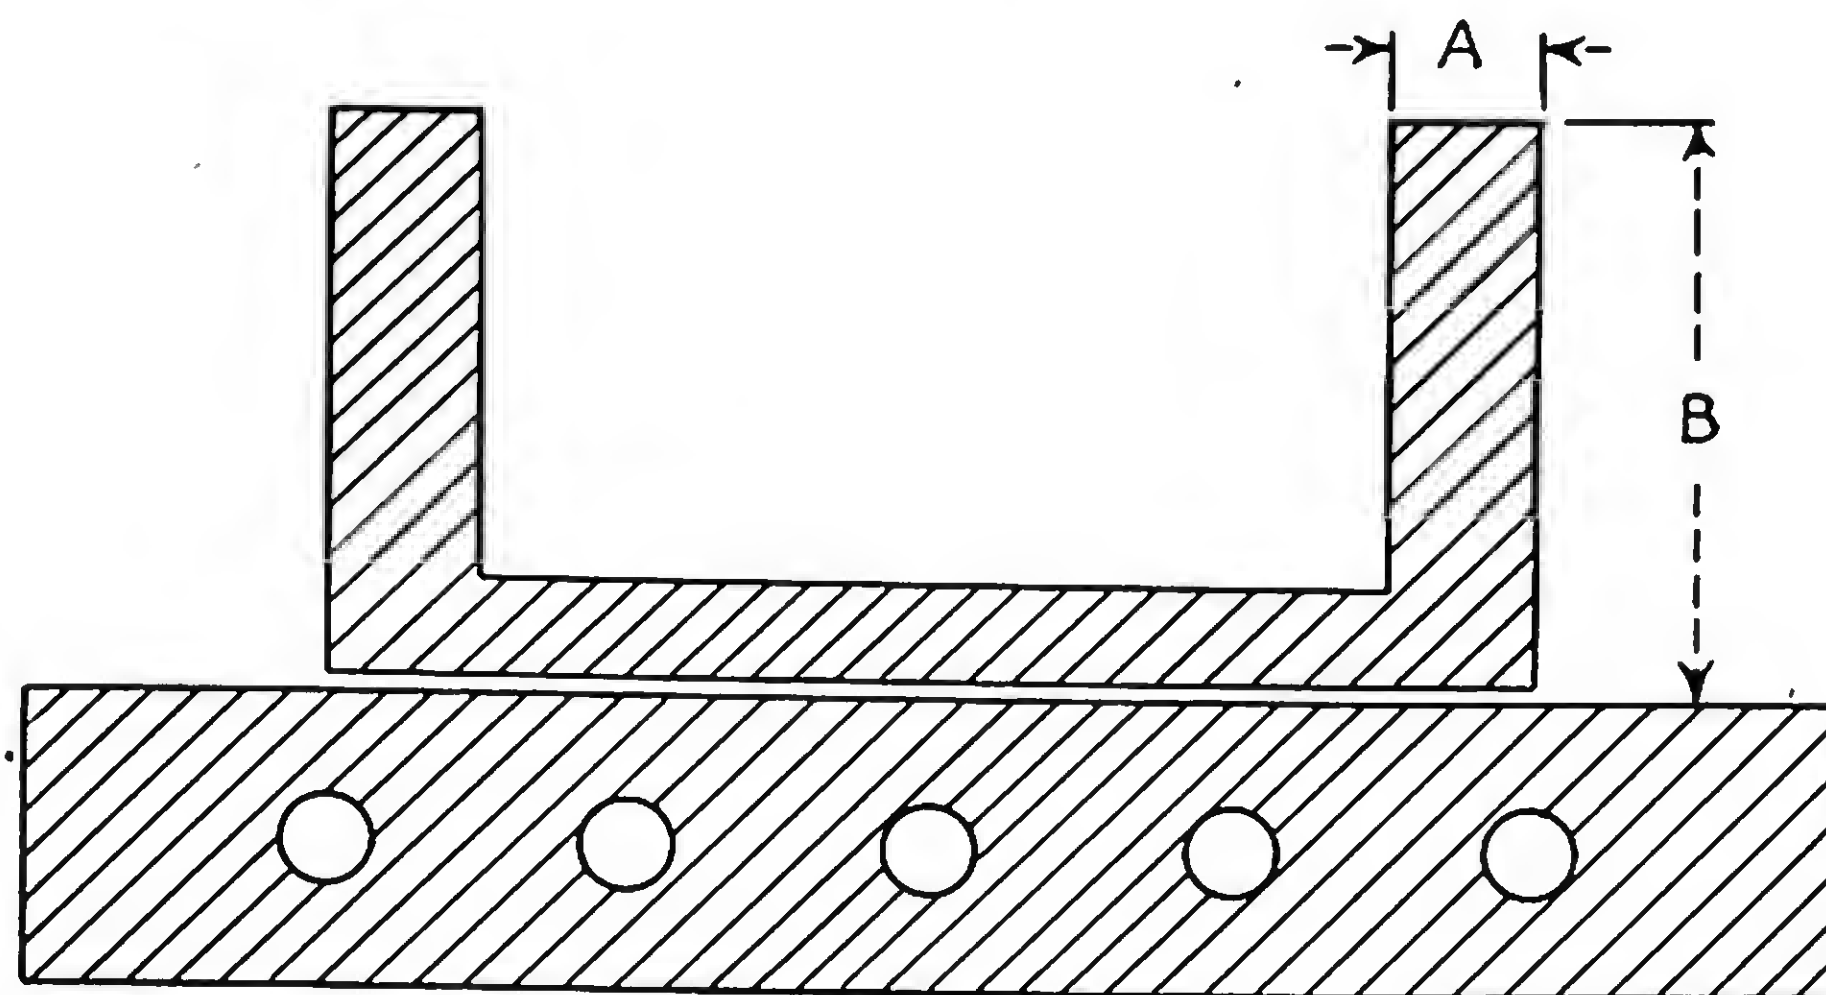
Mold cavity. A, width or thickness of the sidewall; B, height of the mold.
